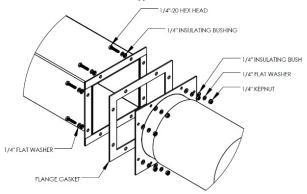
Track Duct to Flexible Connecting Duct Assembly
